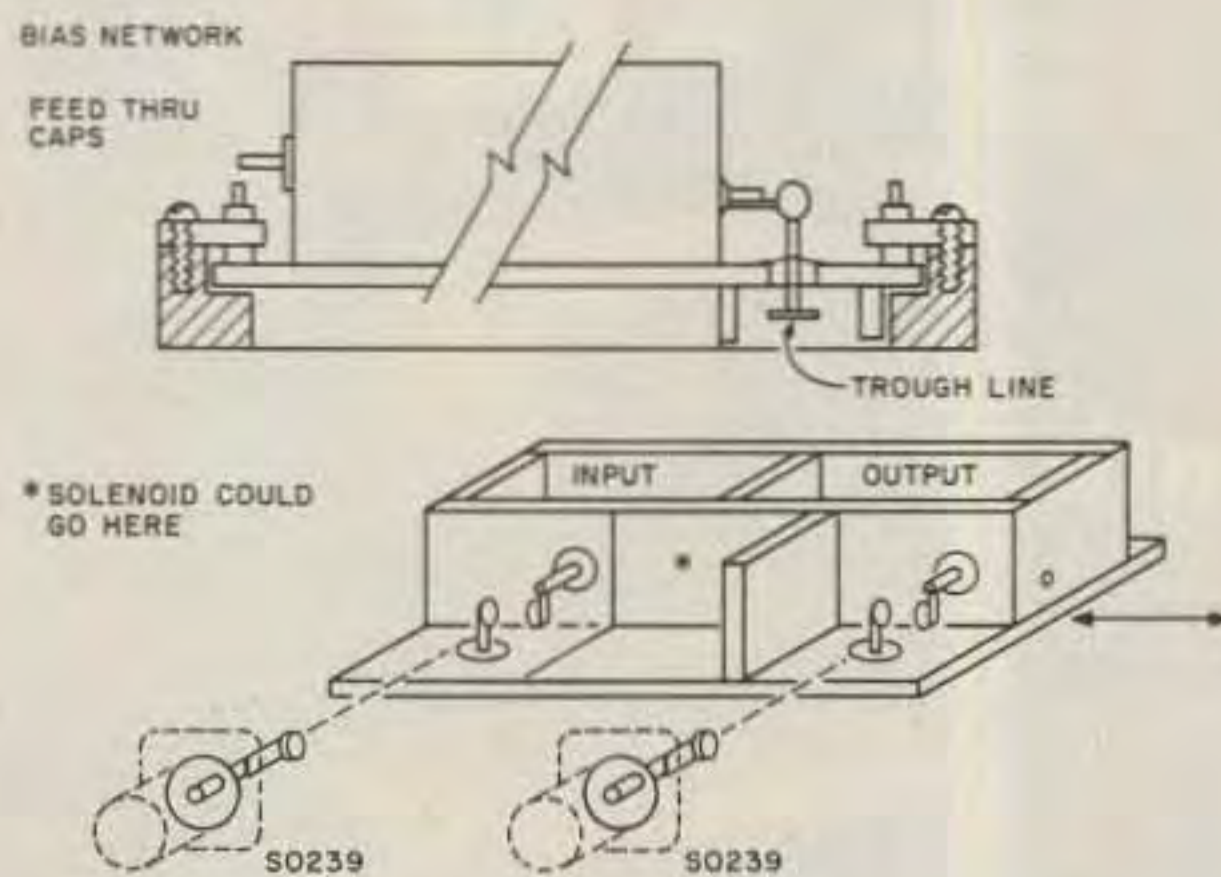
The approximate method of fabricating the double-sided printed circuit board base and shielding of the preamp. The shields are covered with copper foil "lids" that are soldered to the edges of the shield enclosures. The drawing also shows the mechanical details of the switching contacts.
